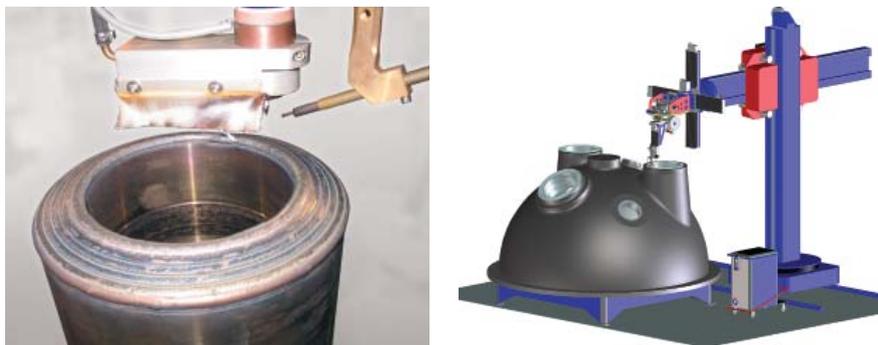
Buttering a nozzle end-piece in preparation for a heterogeneous weld.
